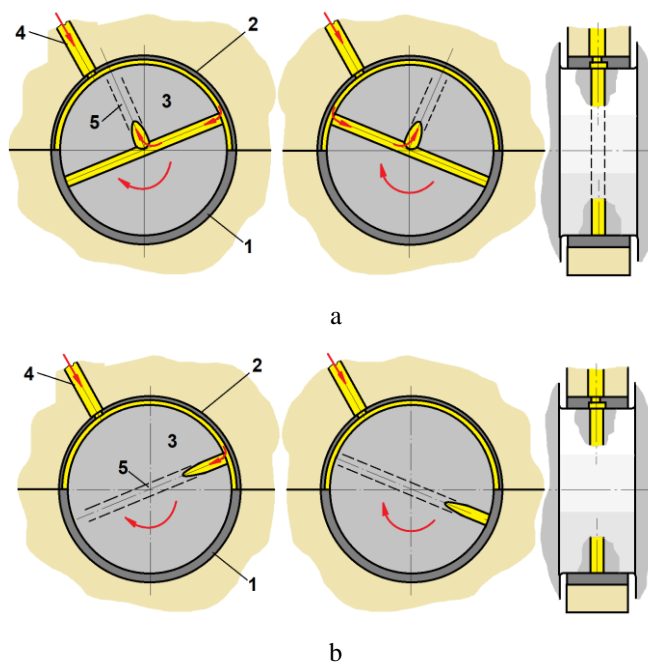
Structural diagrams of the main bearing: a – with a continuous oil supply through a transverse hole in the main journal, b – with an intermittent supply of oil through the hole connecting the main and conrod journals, 1 – lower half of main bearing without a groove, 2 – upper half of main bearing with a groove, 3 – crankshaft, 4 – oil supply channel to the main bearing, 5 – oil supply hole to the conrod journal
